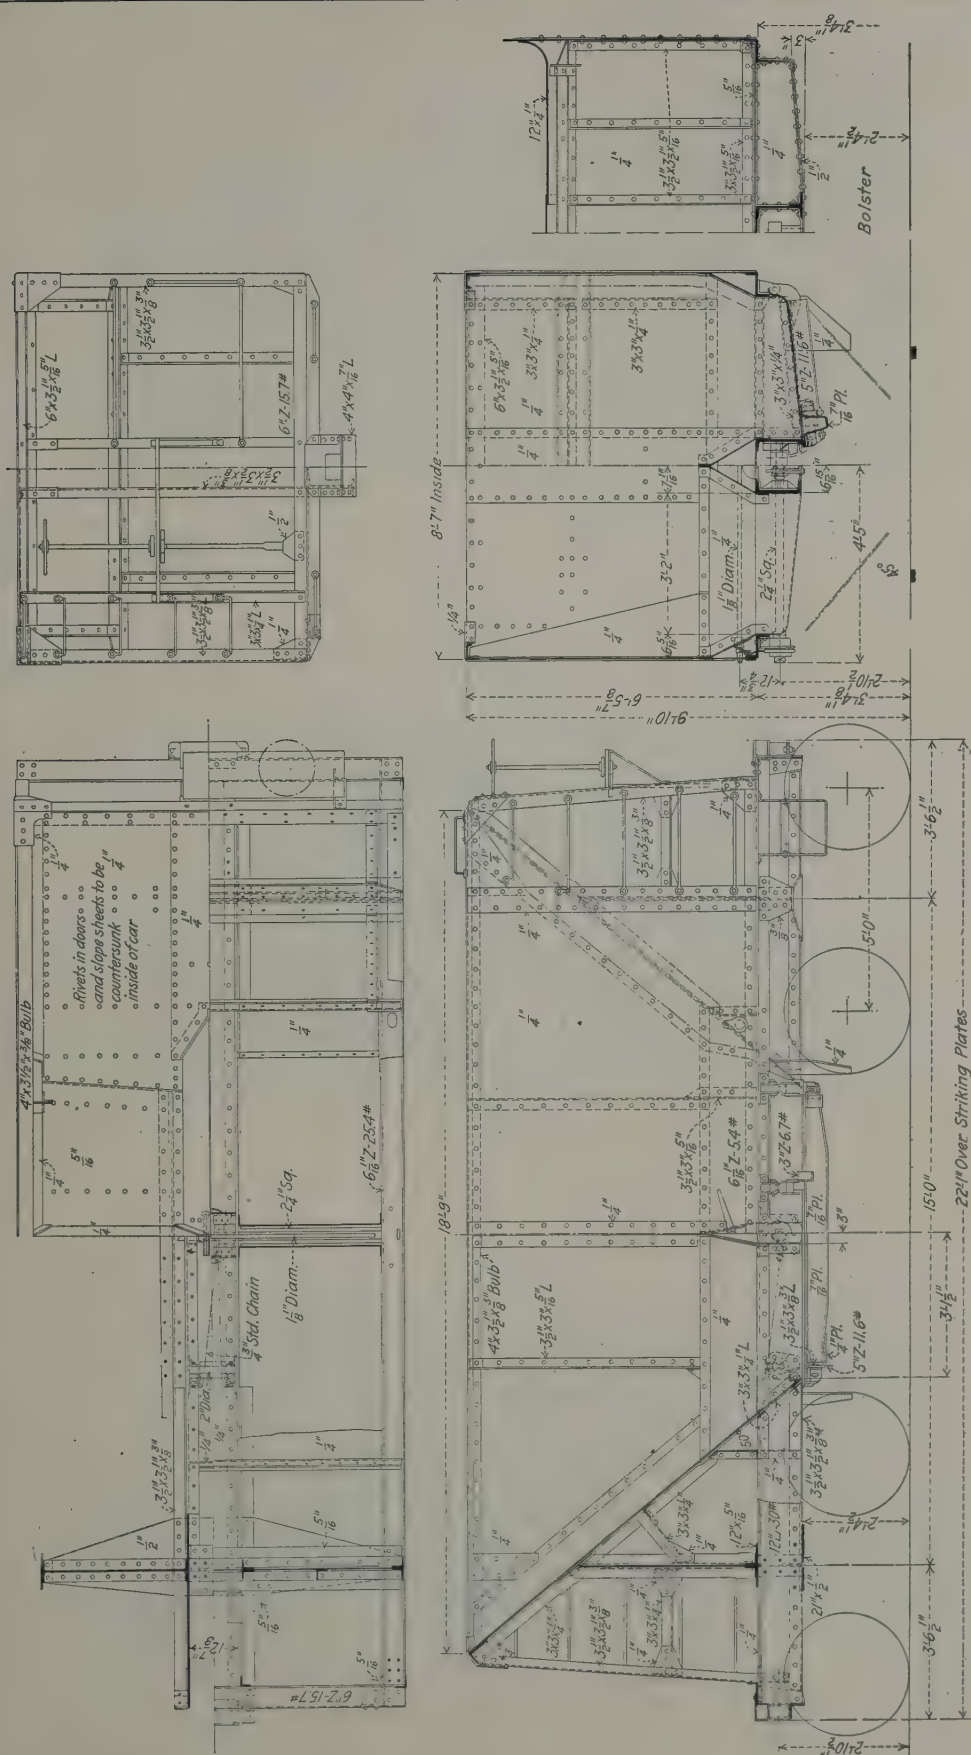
All-Steel 55-Ton Ore Hopper Car. Inside Length, 18 ft. 9 in.; Inside Width, 8 ft. 7 in. Builder, Enterprise Railway Equipment Company.
